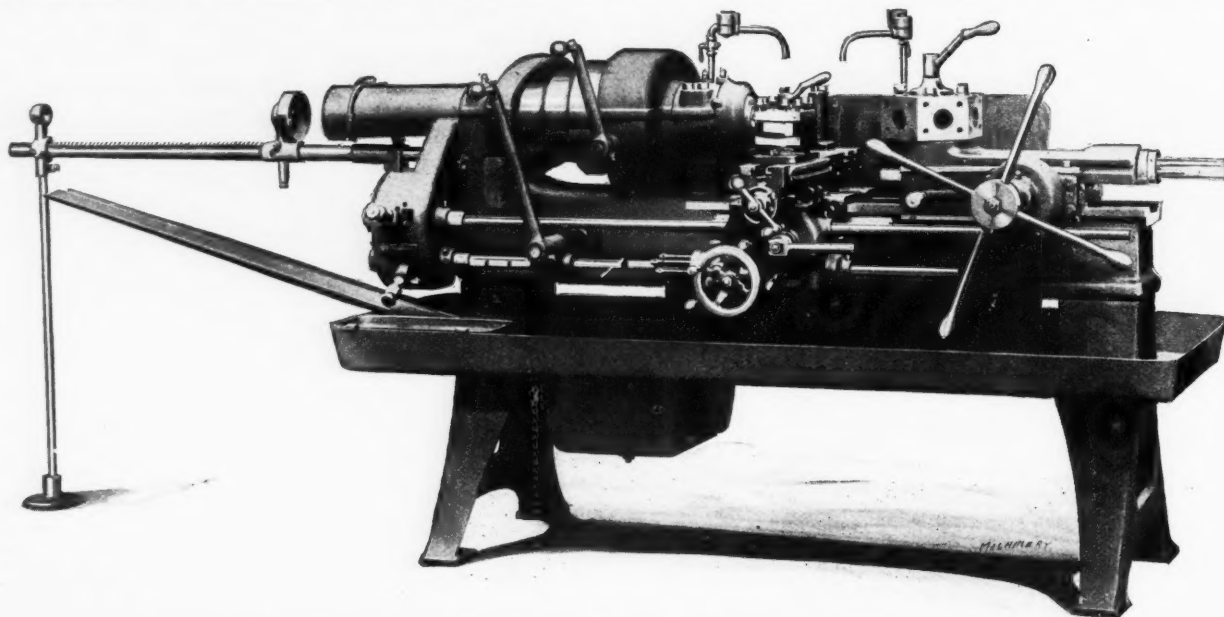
Warner & Swasey No. 4 Universal Turret Screw Machine with Bar Equipment and Cone Pulley Drive
